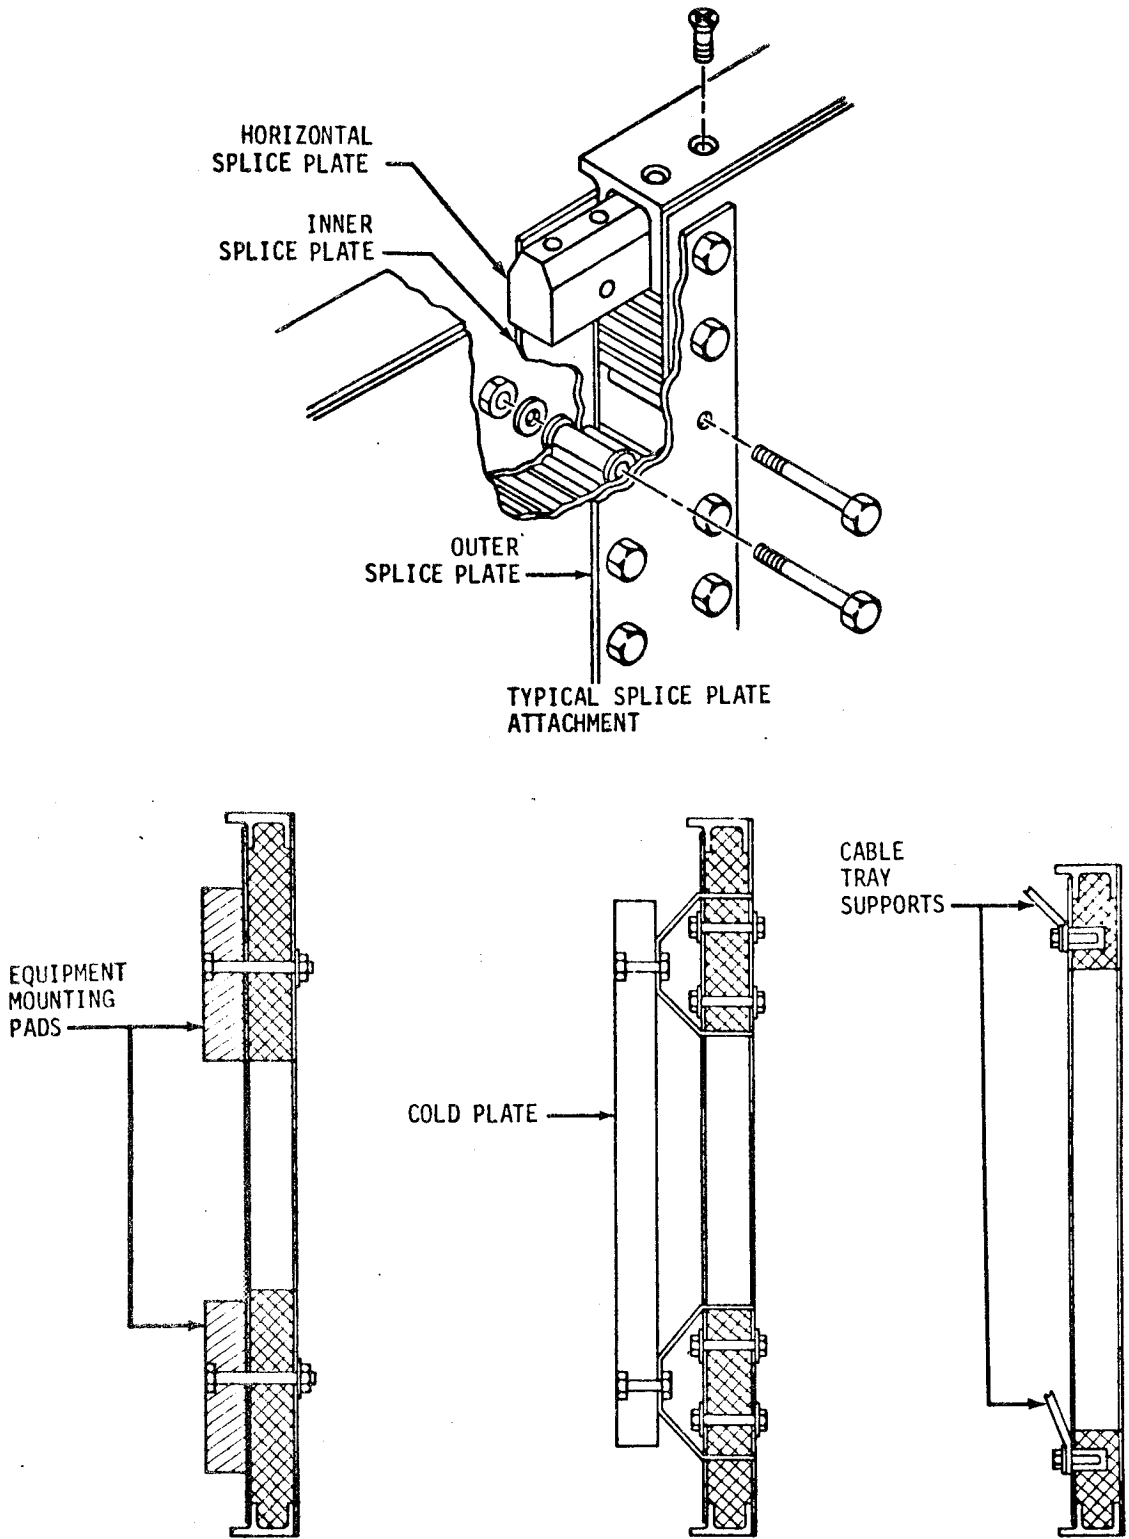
IU PANEL SPLICING AND BRACKET MOUNTING
